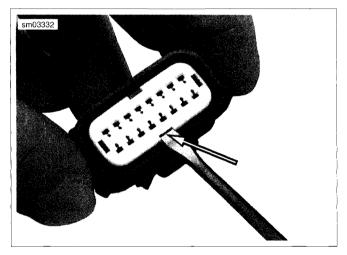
Secondary Lock Pry Slot (Socket Housing)
